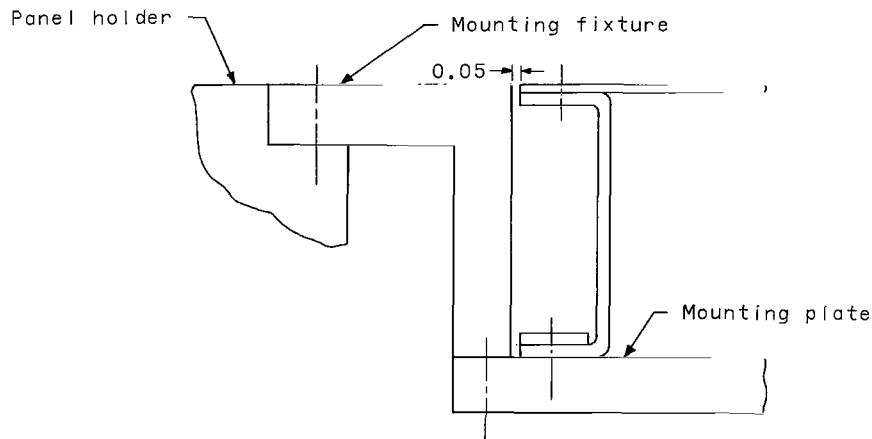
Cross section of panel holder. (All dimensions are in inches.)
